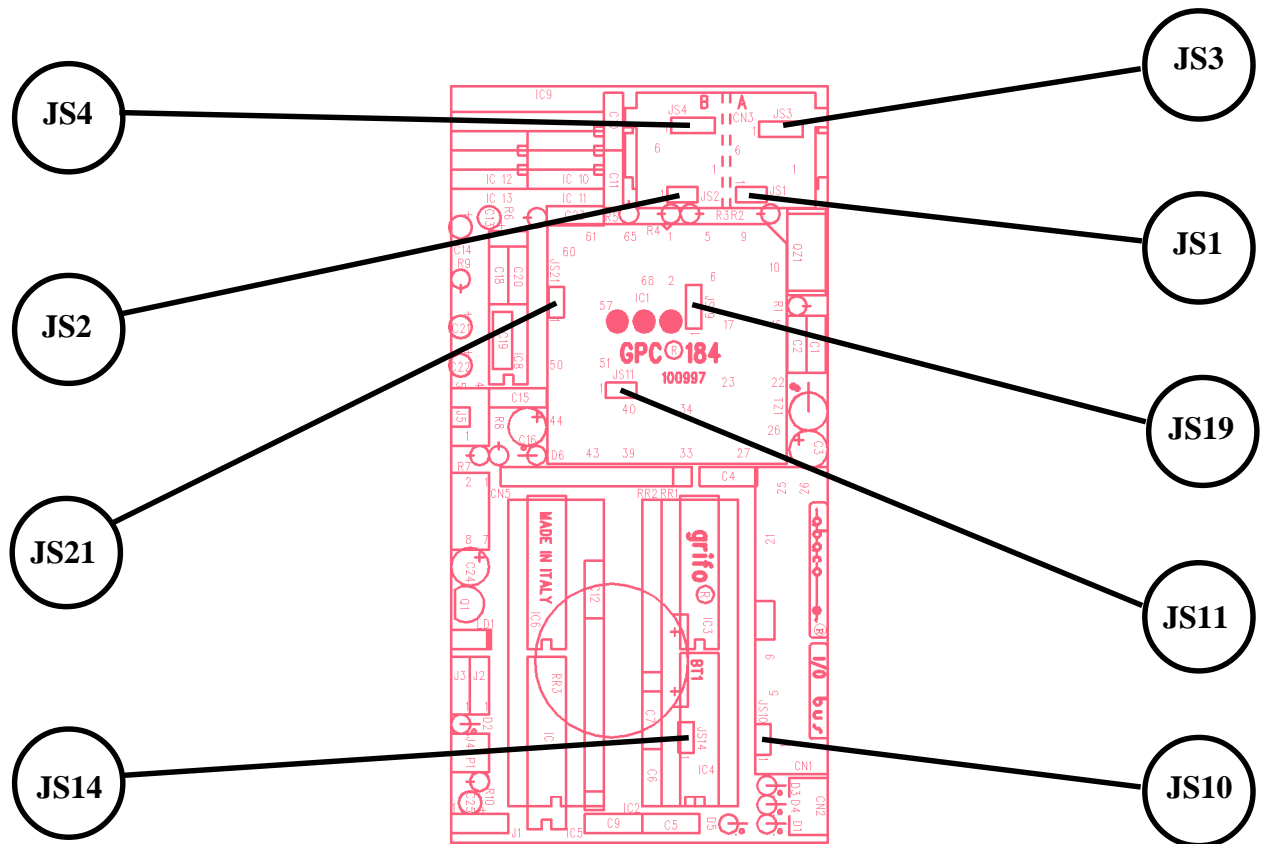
JUMPERS LOCATION (SOLDERING SIDE)
